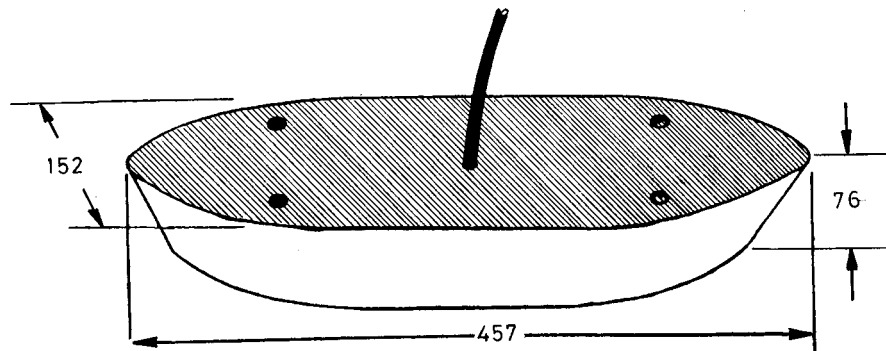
Dimensions of Model 706-50/200T-3000 Transducer and Model 1106 Stainless Steel Stuffing Tube
